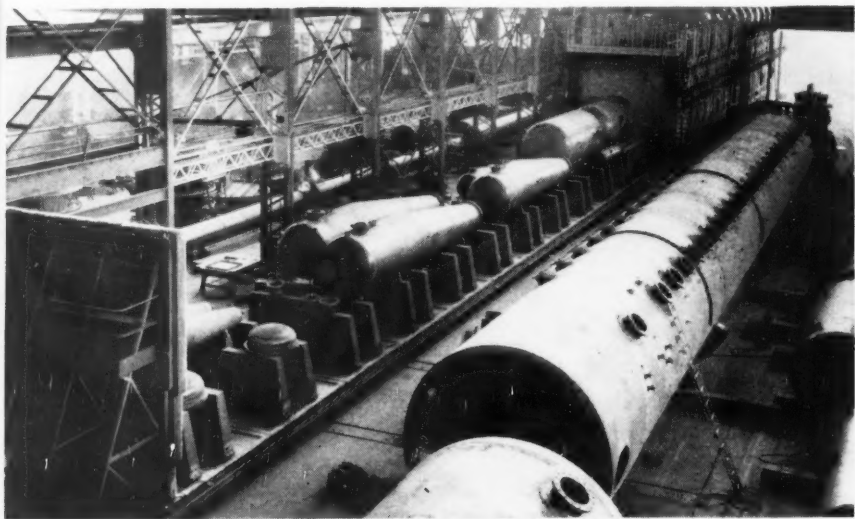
Loaded carrier is shown ready to be moved into annealing oven (center background).
